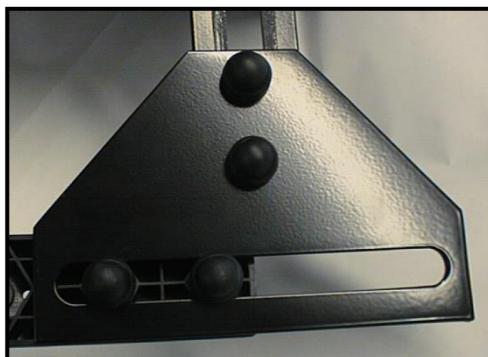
Helios Side Mount & AGD Bracket Assembly (667/1/30200/058)
